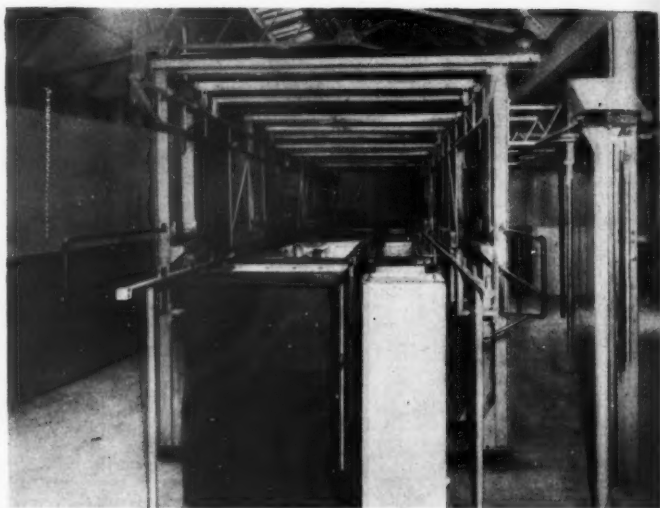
(left) Another view of the machine shown in Fig. 6.
